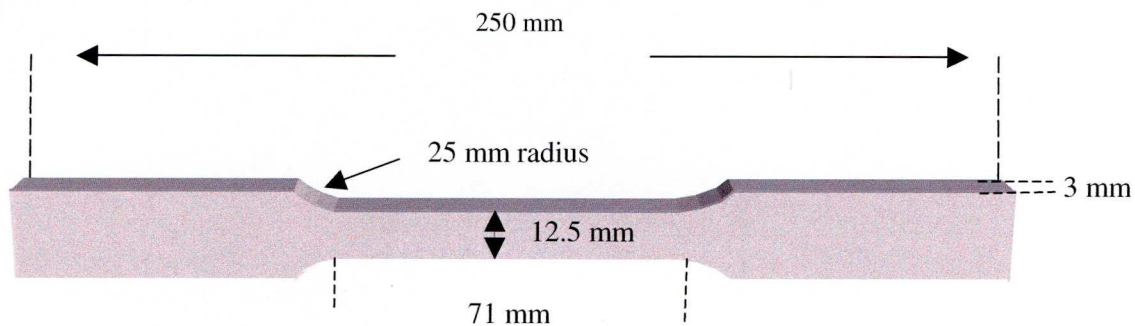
Geometry of flat dog-bone tensile test pieces
